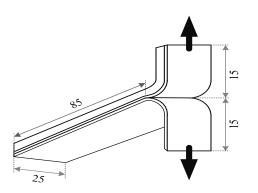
Geometry of the tube of the adhesive joint for testing the resistance to delamination
